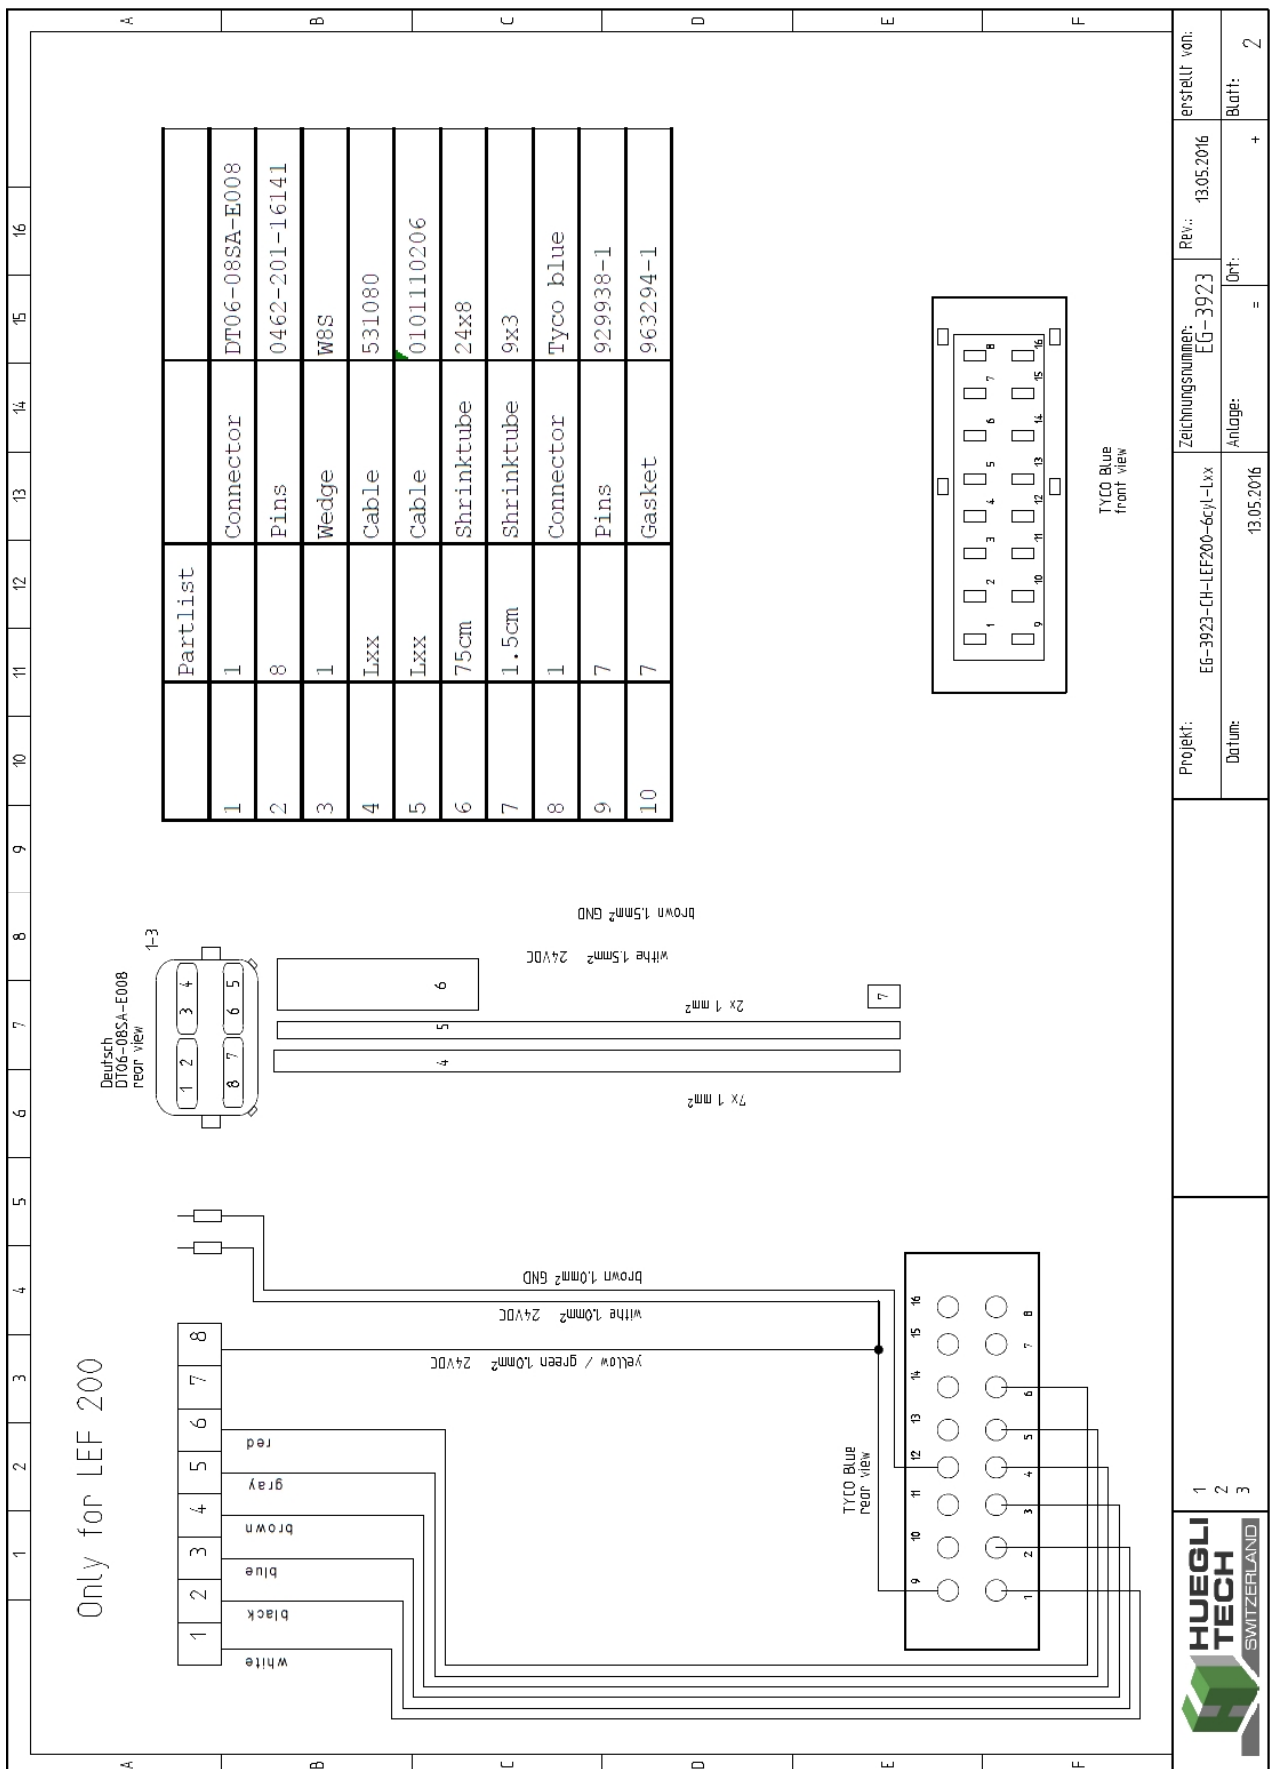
Wiring Harness for Blue Connector (8 Cylinder Engine)
